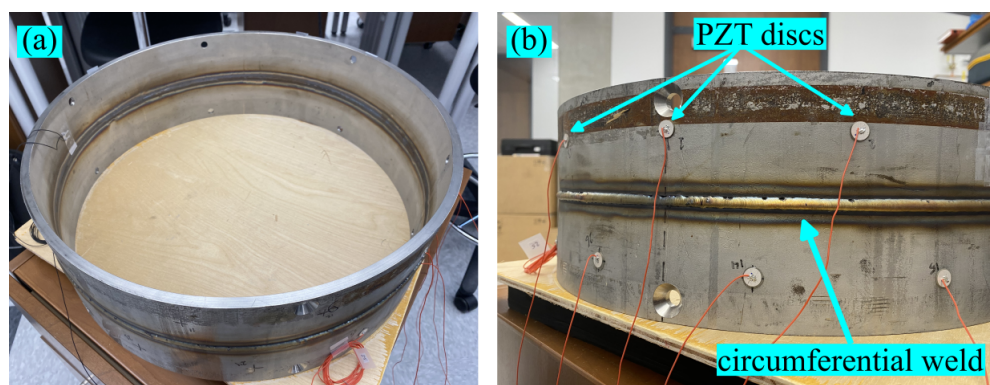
The canister cut specimen with the circumferential weld.
